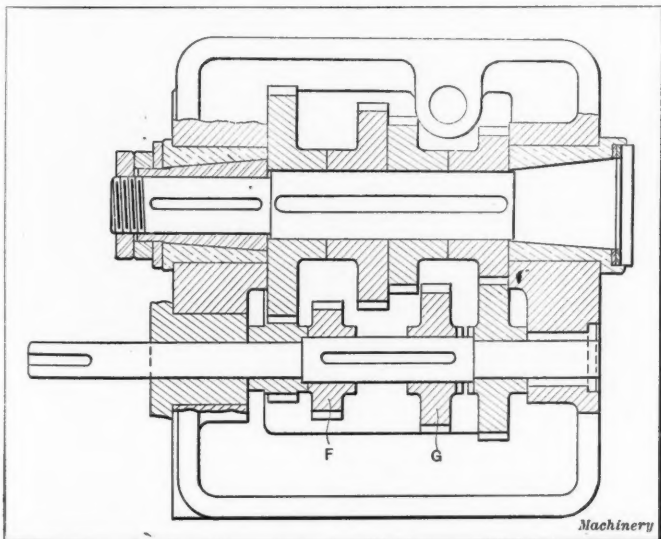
Change Gears for varying the Cutter Spindle Speed
